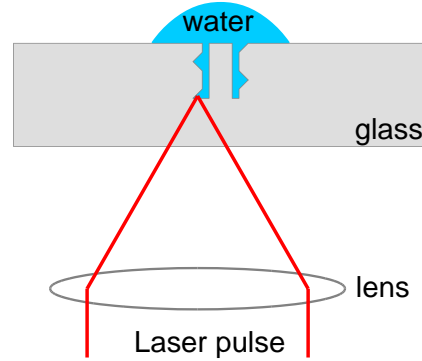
Scheme of fabricating miniature internal thread in glass using water-assisted laser processing.
